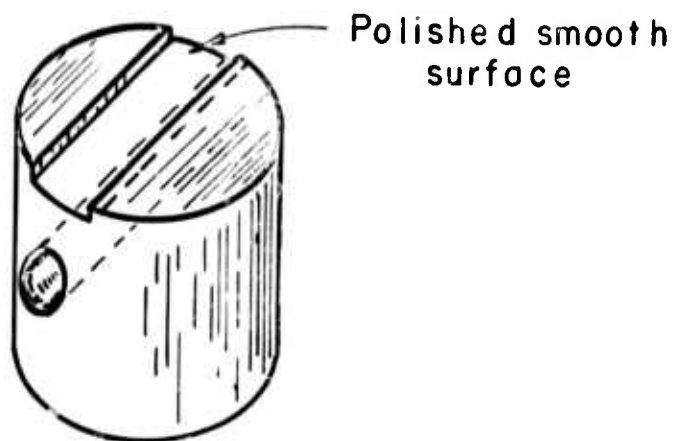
Modified lower Si-block to ensure more uniform seed heating
